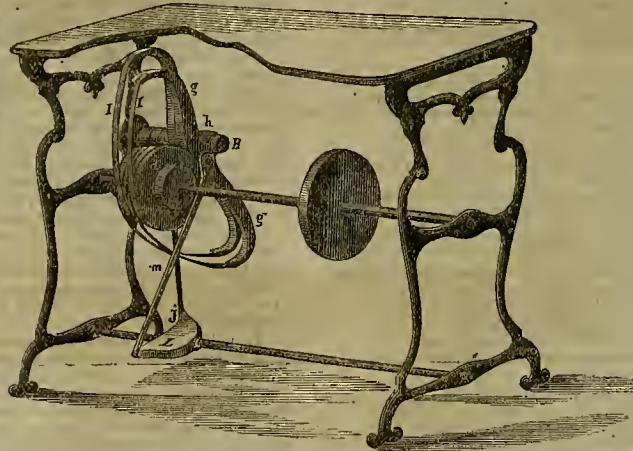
IMPROVED TREADLE FOR SEWING MACHINES.
